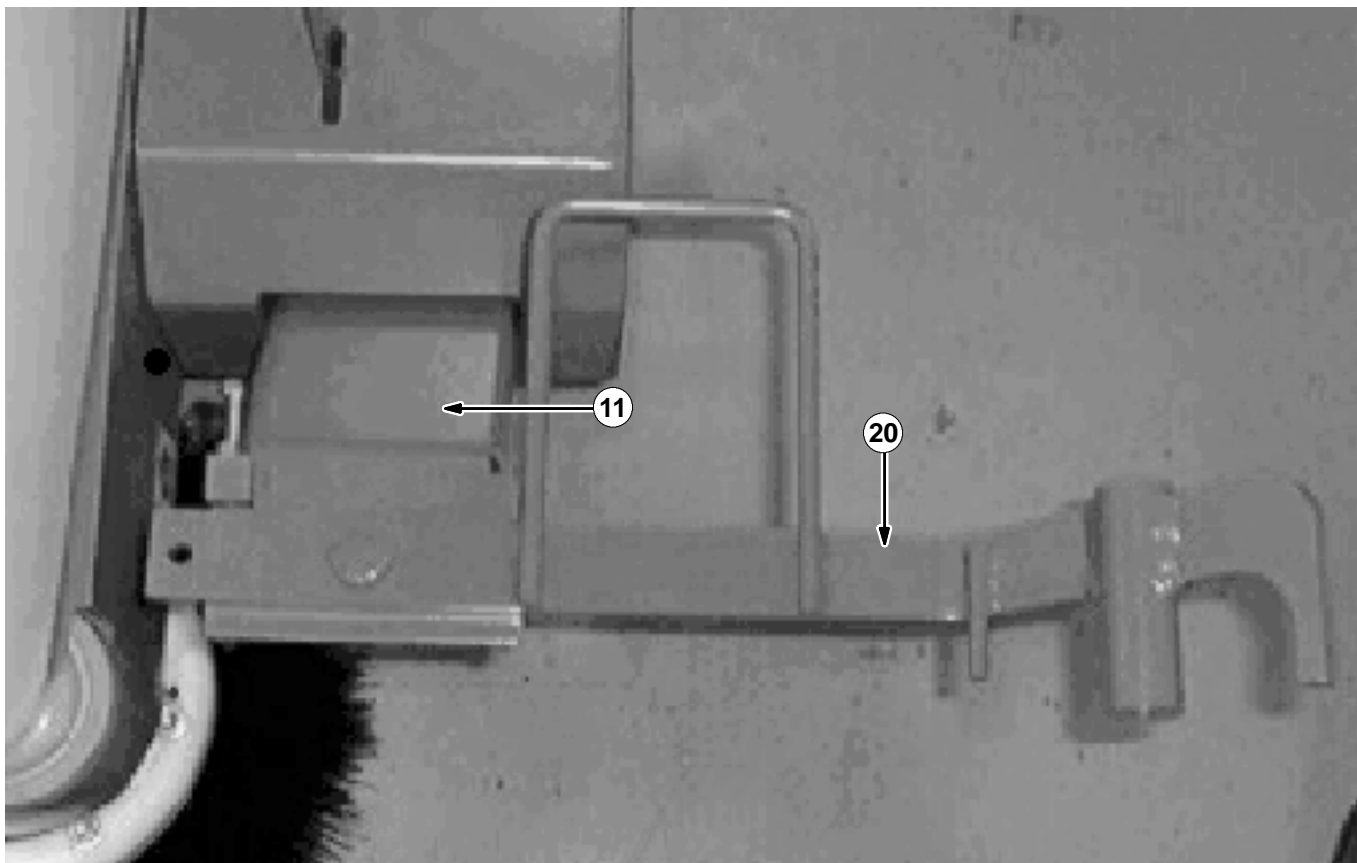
LEFT AND RIGHT HAND CHANNEL WELDMENT ASSEMBLY
